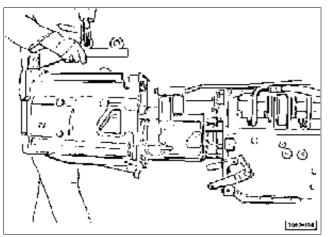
Using a hoist, unite the front and rear transmission housings.
